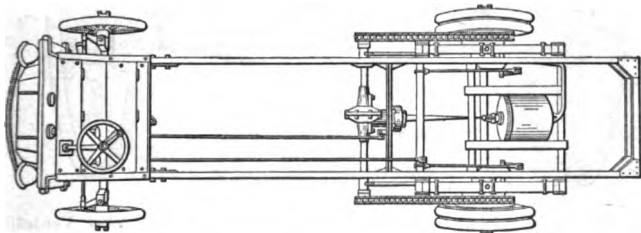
Top view of chassis showing drive assembly. (General Motors Company.)
